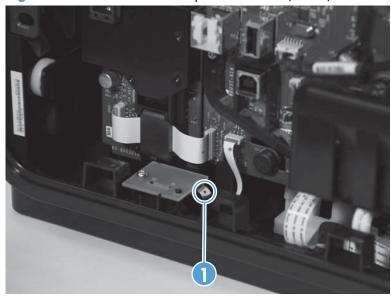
Remove the duplex module sensor PCA (2 of 2)
